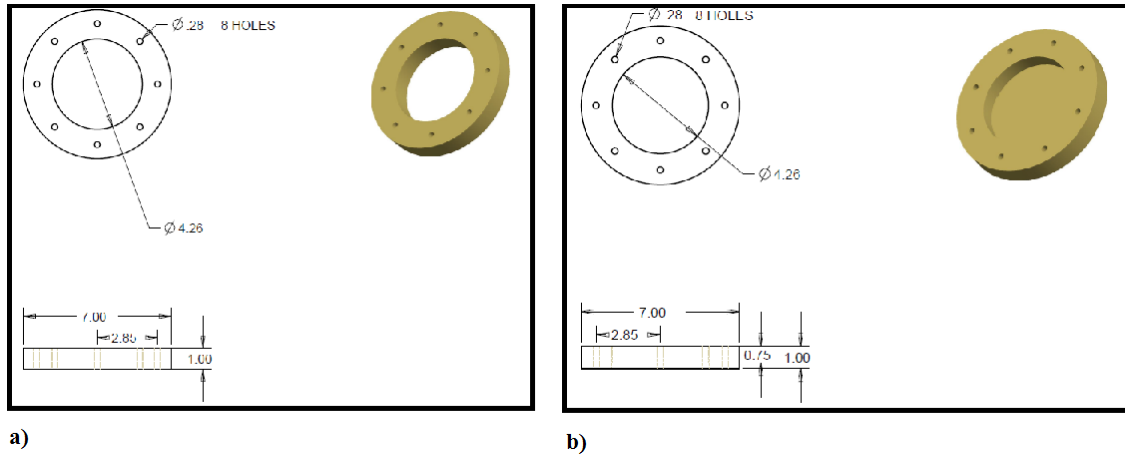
a) Top and b) bottom flanges for 4 in. column
